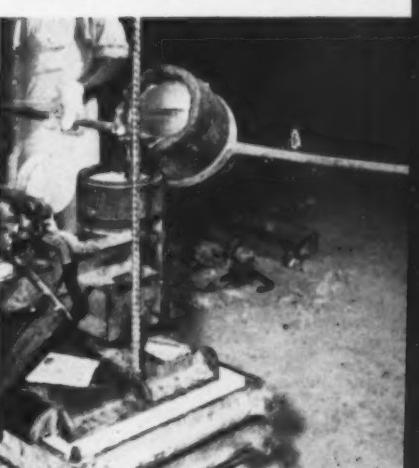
(Center right) . . . Asbestos disc placed between sprue and metal-holding cylinder holds back metal until 2 psi air pressure is applied, then breaks and shoots metal into the mold.
